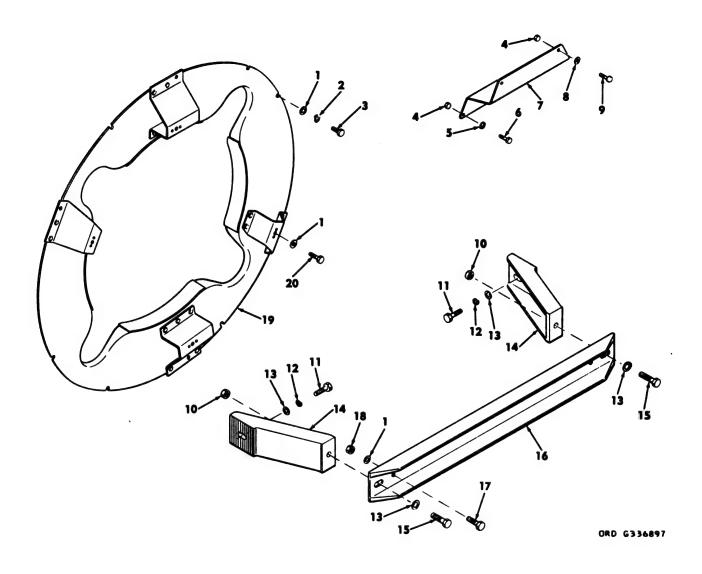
CONTAINER ASSEMBLY, BOLTED, AFT BODY /9031497/ /SEE FIGURE 126 FOR NEXT HIGHER ASSEMBLY/
